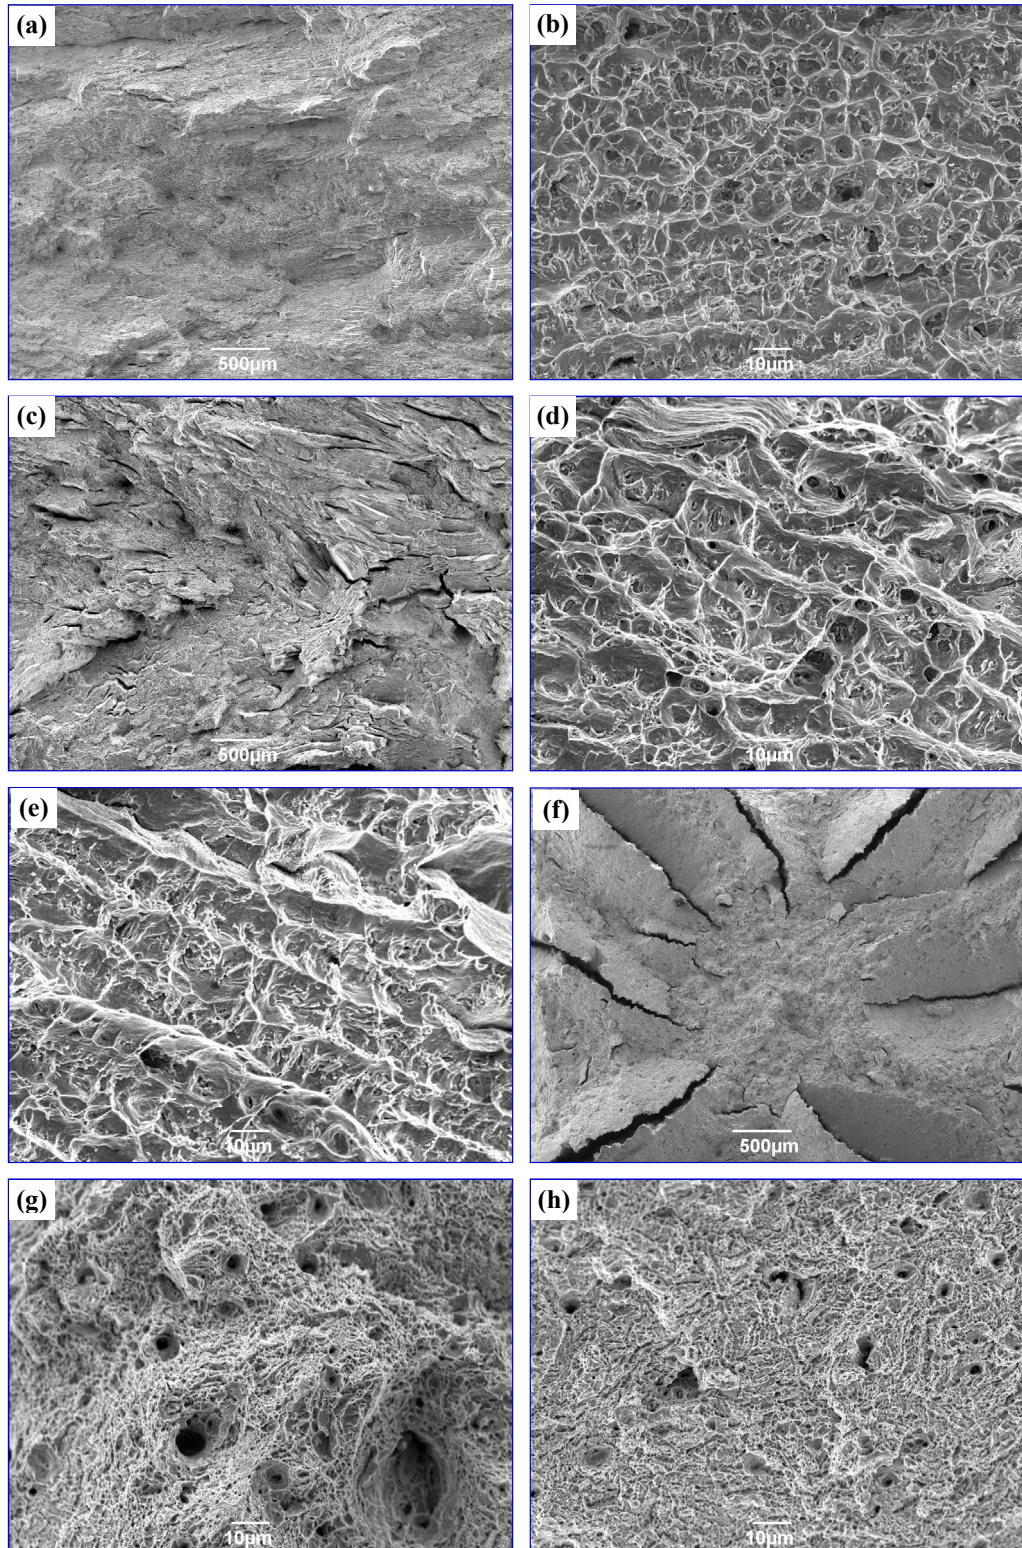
Tensile fractures of weld joints with three welding materials (a) surface morphology of ERNiCr-3 (b) central fiber zone of ERNiCr-3 (c) surface morphology of ERNiCrCoMo-1 (d) central fiber zone of ERNiCrCoMo-1 (e) radiation zone of ERNiCrCoMo-1 (f) T-304H (g) central fiber zone of T-304H (h) radiation zone of T-304H
